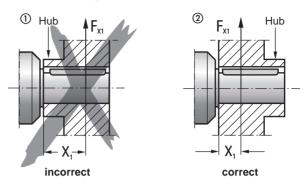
Correct mounting arrangement of a gear or sprocket wheel
